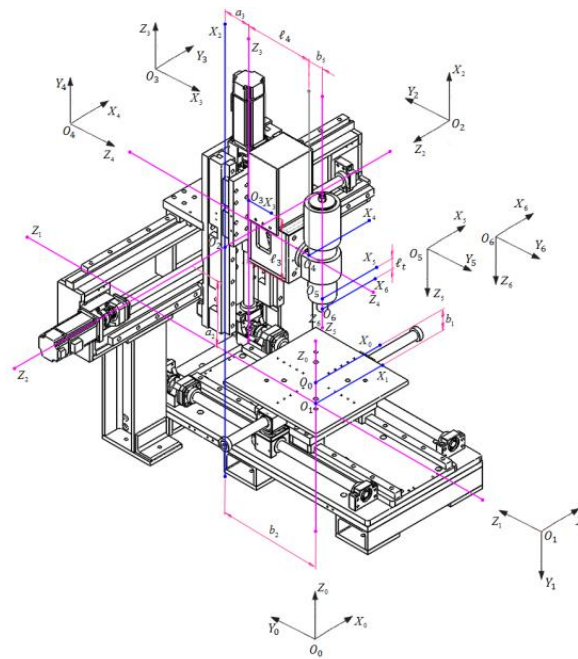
Hybrid parallel-serial five-axis machine tool.
